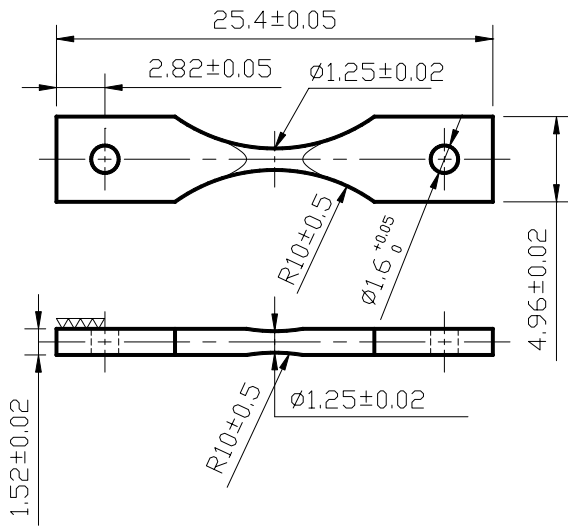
Dimension of miniaturized hourglass-shaped fatigue specimen.
